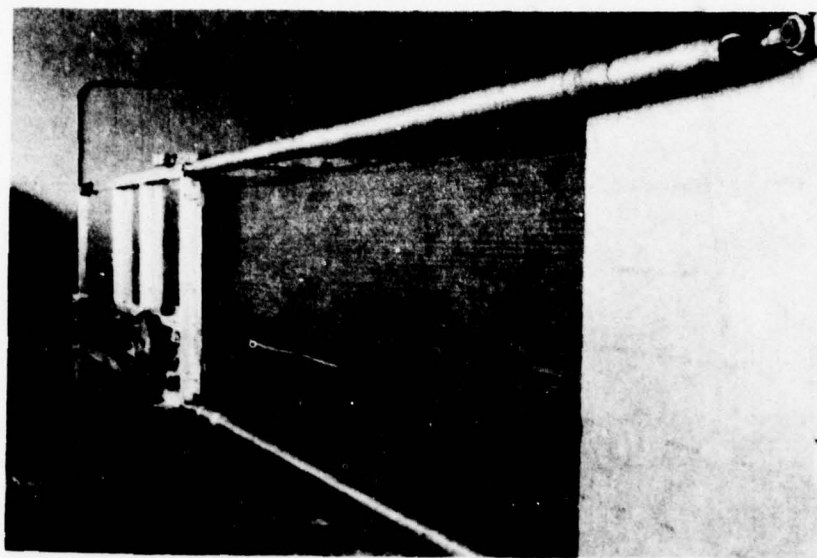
SIDE VIEW OF FIBERS DURING ASSEMBLY
